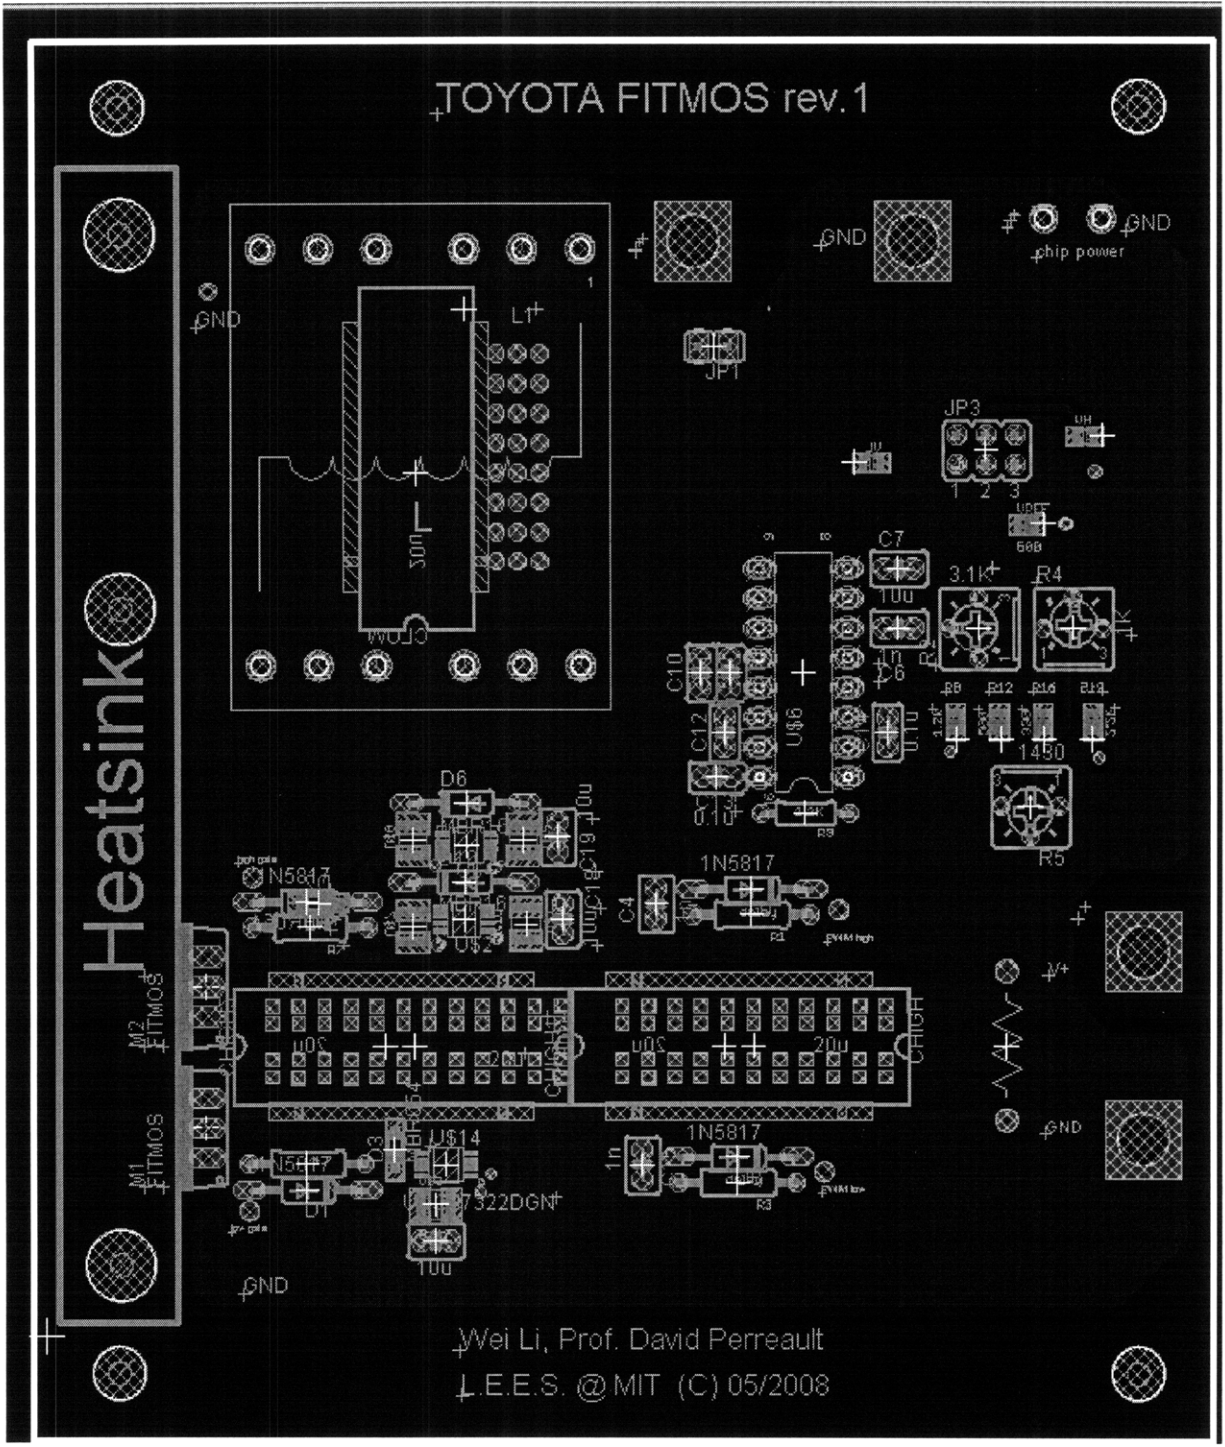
The first layer PCB layout drawn in EAGLE.
